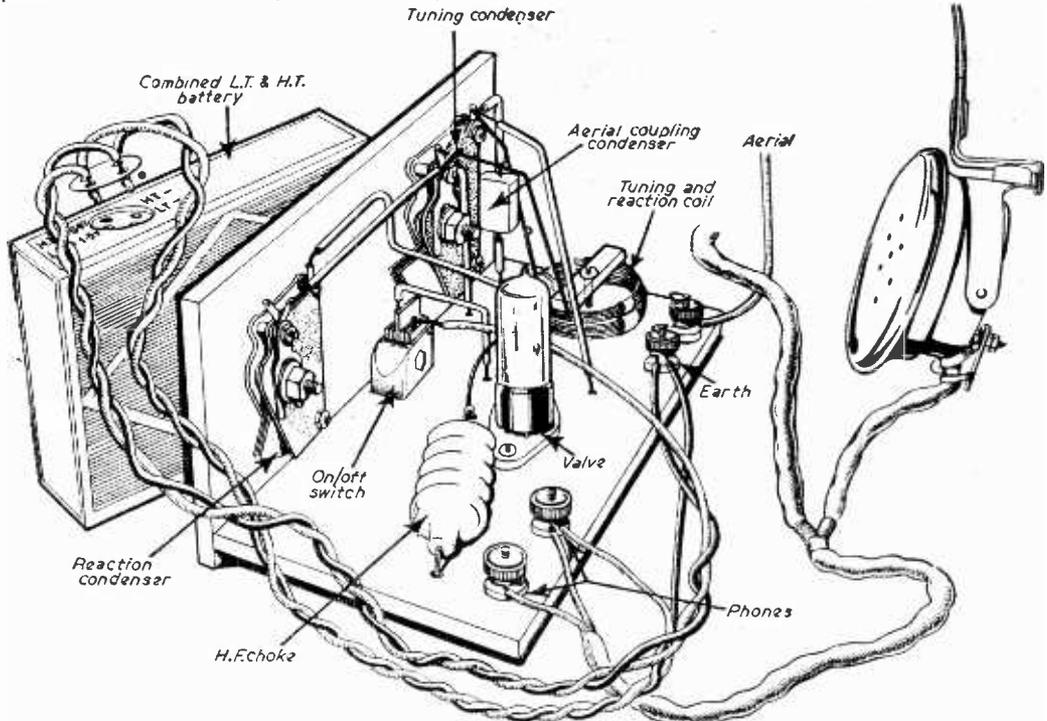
Pictorial wiring diagram of circuit shown by Fig. 1. Some of the wiring is underneath the baseboard, which is fixed to the panel to clear the valve holder sockets.
